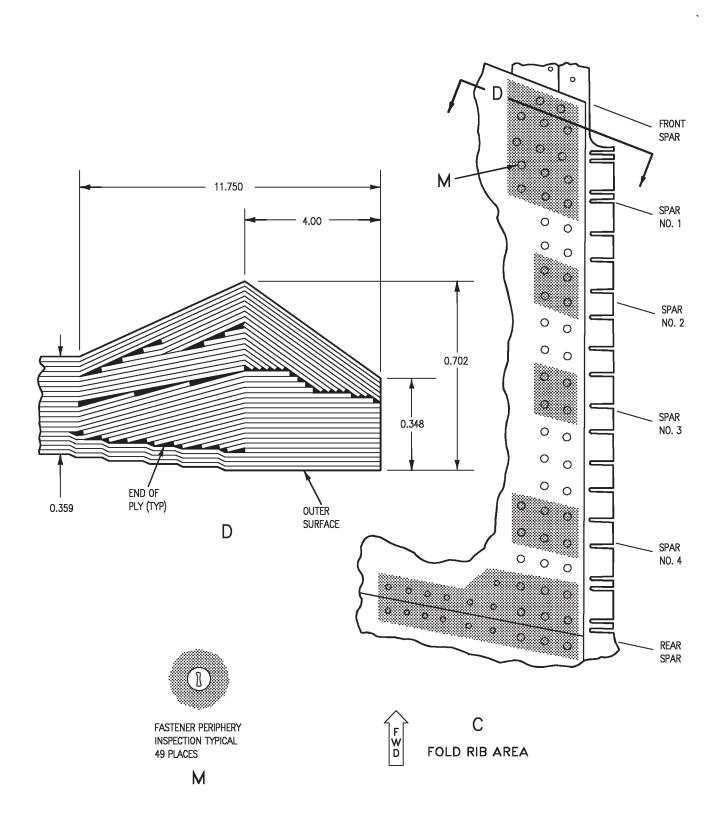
Inner Wing Lower Surface Solid Composite Laminate and Door Sill Inspection Areas (Sheet 3)
